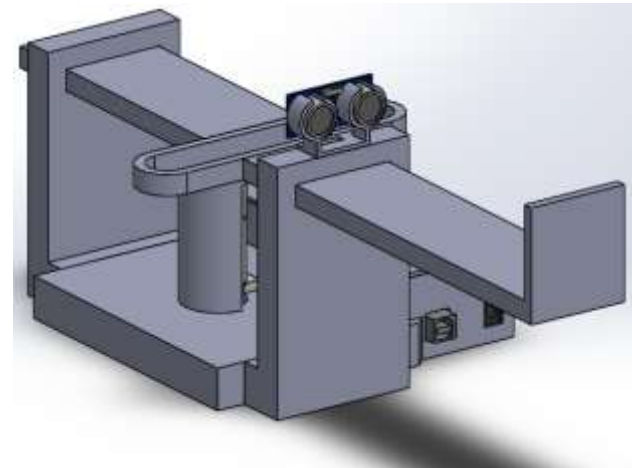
Ultrasonic sensor, encoder motor and Arduino board in the prototype
